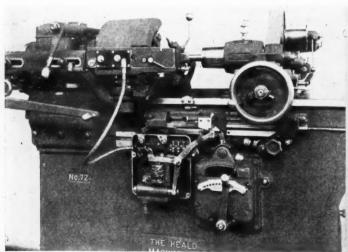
Heald Full Automatic Grinder which has magnetic control for sizing, wheel dressing and completing cyclic operation
